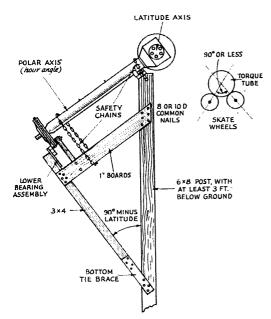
Drive mechanism for the big array, before the wooden structure is mounted in place. Principle components are Buick rear end and torque-tube drive. Both ends of the torque tube turn on bearings made of roller-skate wheels. Position of the torque tube and skate wheels in the upper bearing is shown at the upper right.
